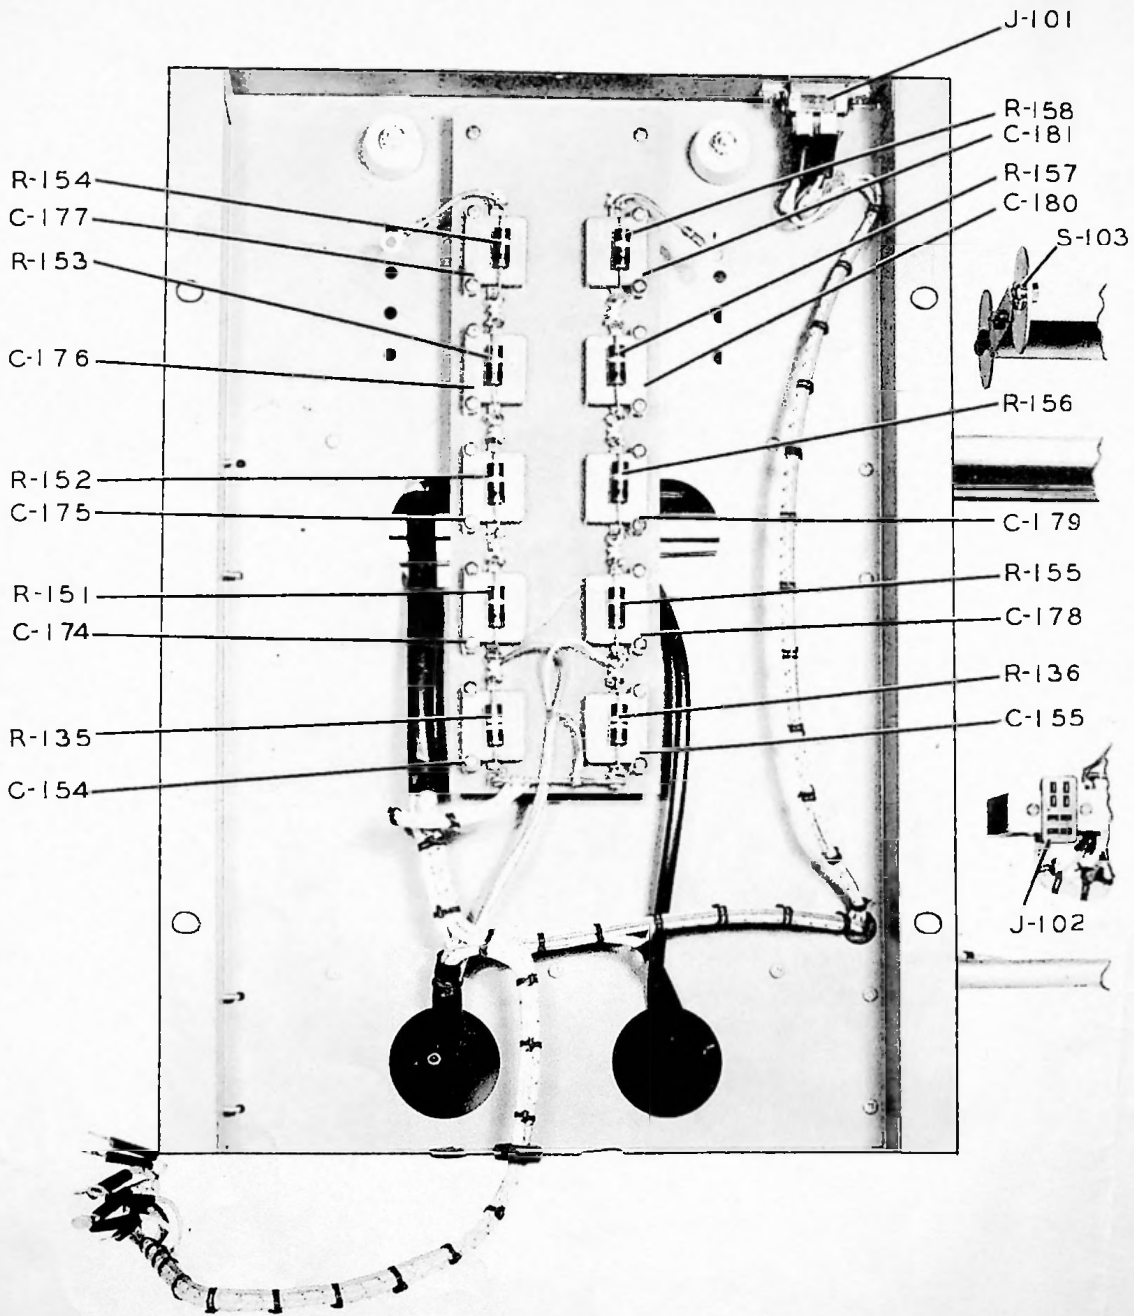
Driver Cabinet Audio Chassis, Side View
